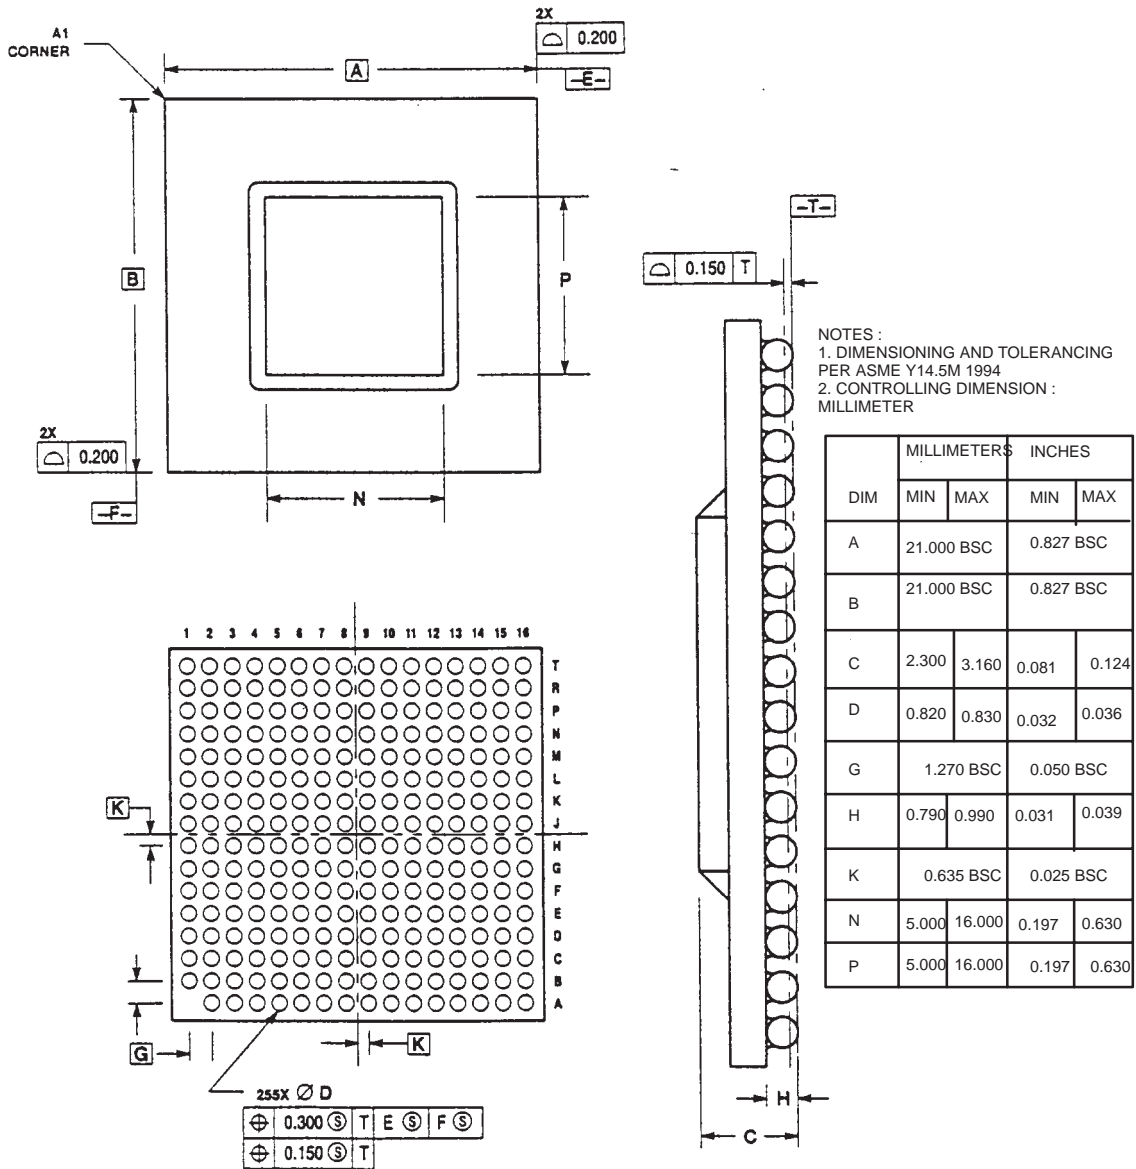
Mechanical dimensions and bottom surface nomenclature of the CBGA package
